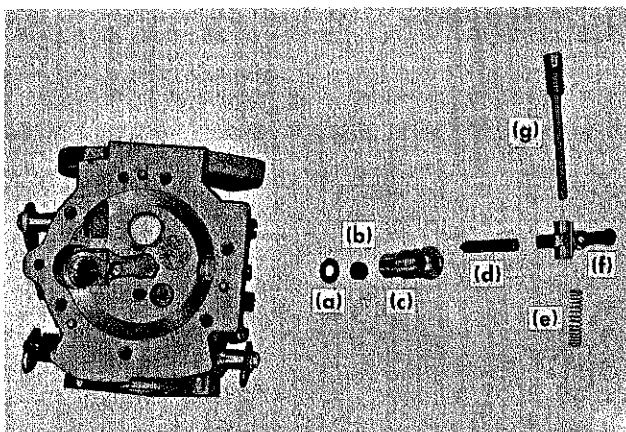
Parts of the fuel inlet control consist of (a) inlet seat gasket, (b) seat, (c) needle valve body, (d) needle, (e) spring, (f) lever, (g) pinion screw.
